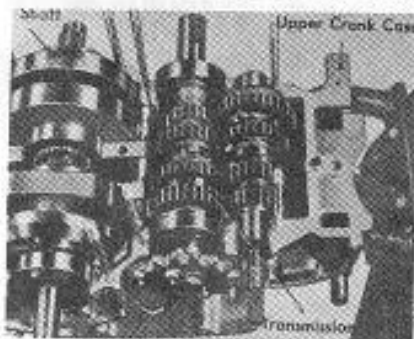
View of crankshaft and transmission gears assembled in upper crankcase.
